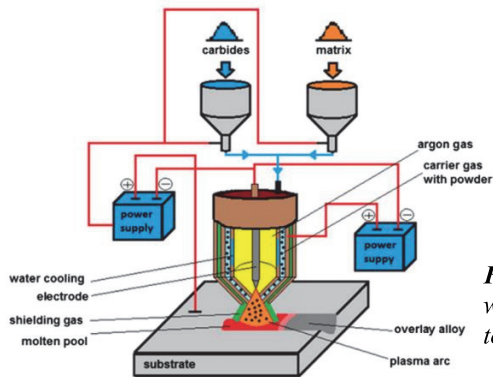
Depiction of PTA welding with carbide and matrix powders gas fed to the weld torch [25].
